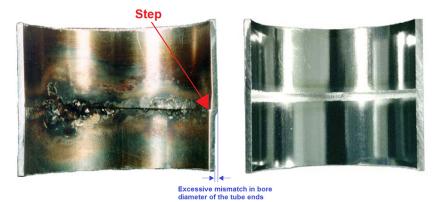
Step due to excessive mismatch in bore diameter of the tube ends.
